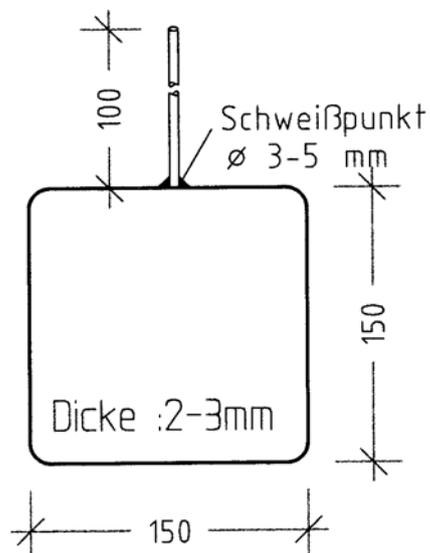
Test panel for testing the suitability for cathodic corrosion protection, with soldered welding wire (soldering area sealed)
